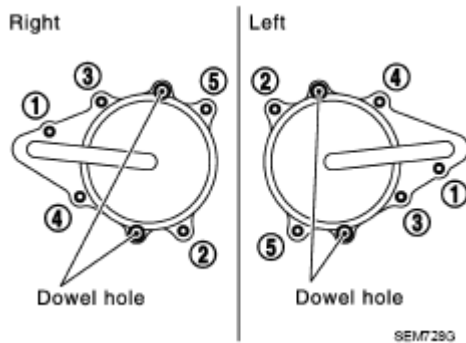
Identifying Dowel Pins On Chain Case With Holes
